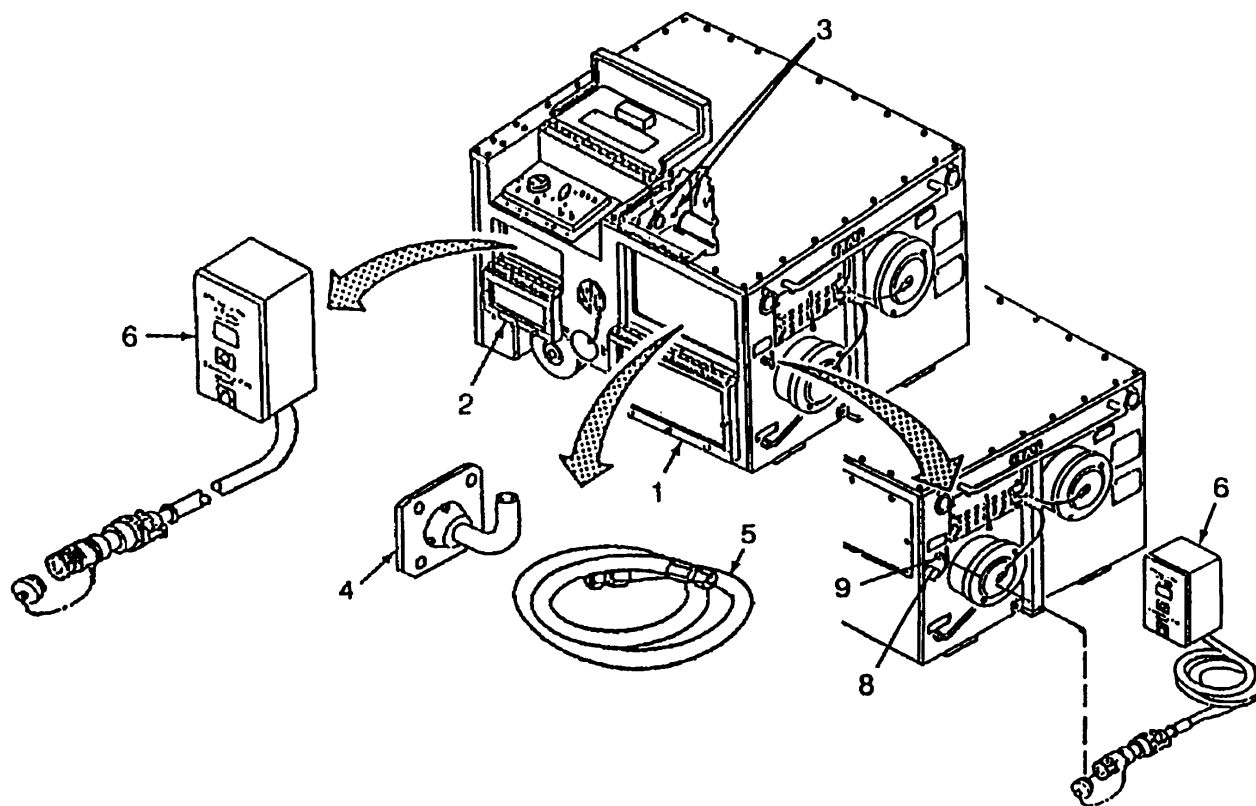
Assembly of Equipment (Sheet 1 of 2)
